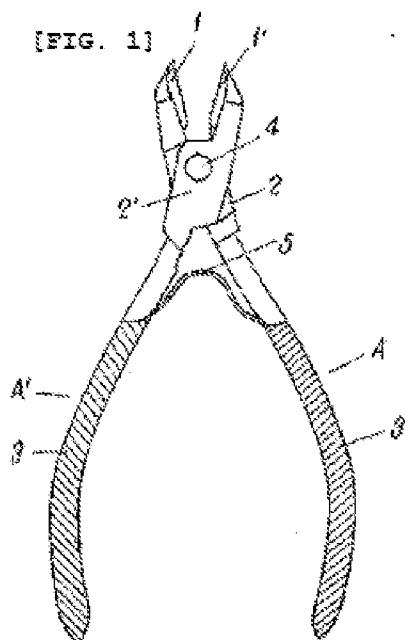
is a top view of a conventional hand tool; Fig. 2, a top view illustrating an embodiment of the hand tool of the present device; and Fig. 3, a top view illustrating the condition of the same tool when it is not in use.
